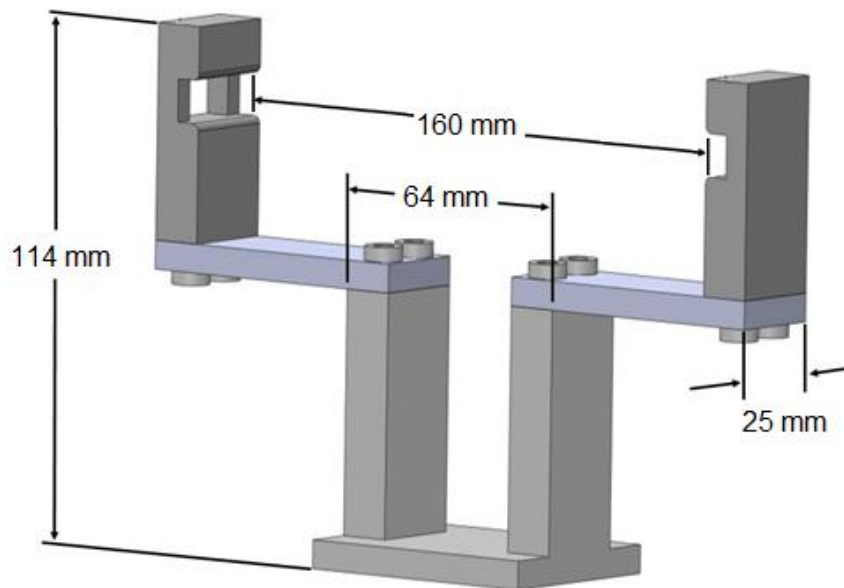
Three-point bending testing frame dimensions (picture courtesy of Bryan M. Tyson).
